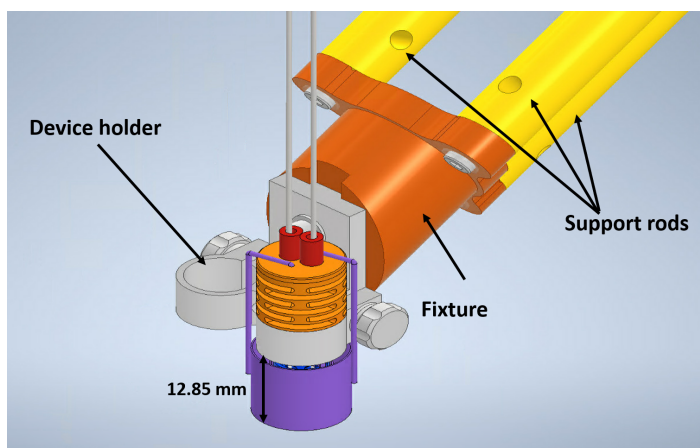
CAD illustration of the evaporator assembly mounted on the device holder which has been described in chapter 4.
